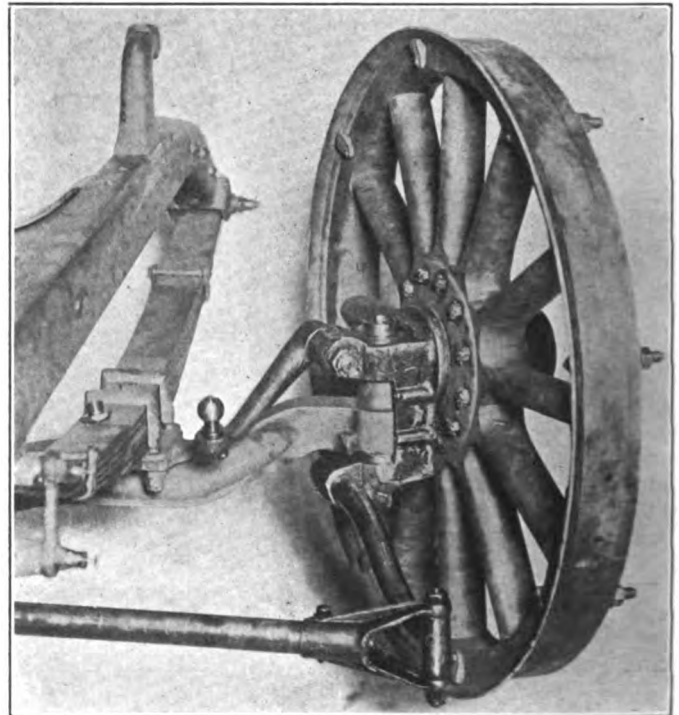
Front axle and knuckle, depicting the steering arm and cross-rod with liberal universal joints
